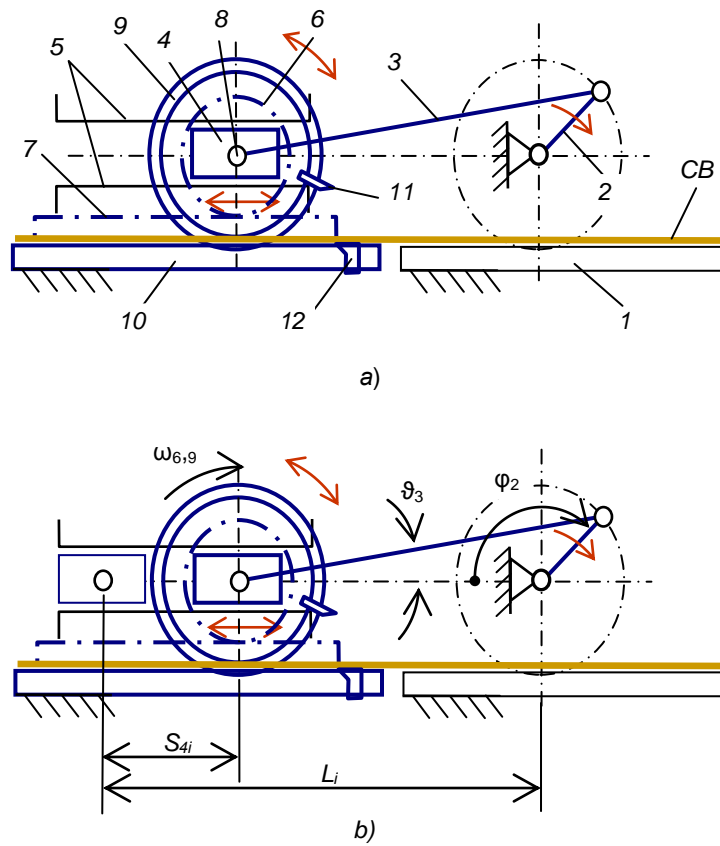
Cutting unit of grooves in cardboard blank made from corrugated board: kinematic (a) and computational (b) schemes, authors'
